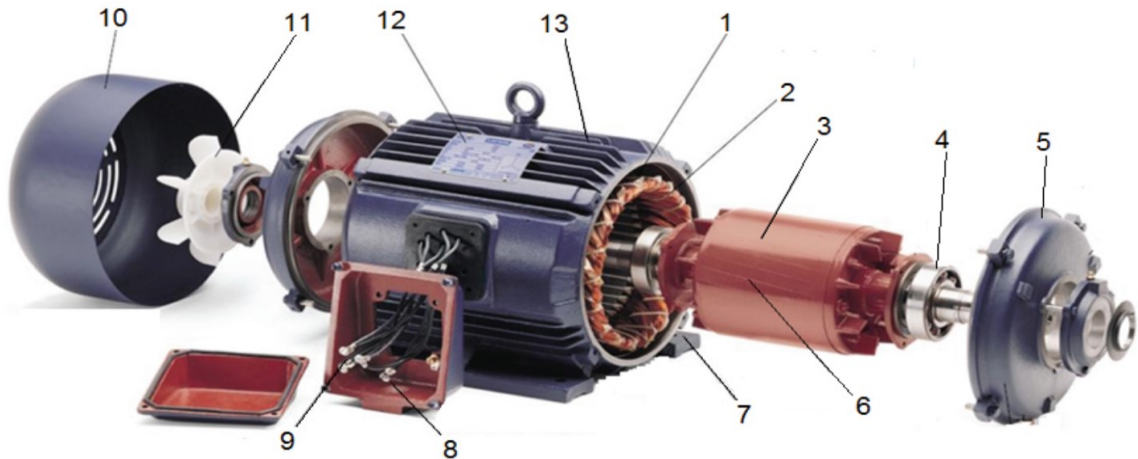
A squirrel-cage induction motor (IM) in exploded view, where:
